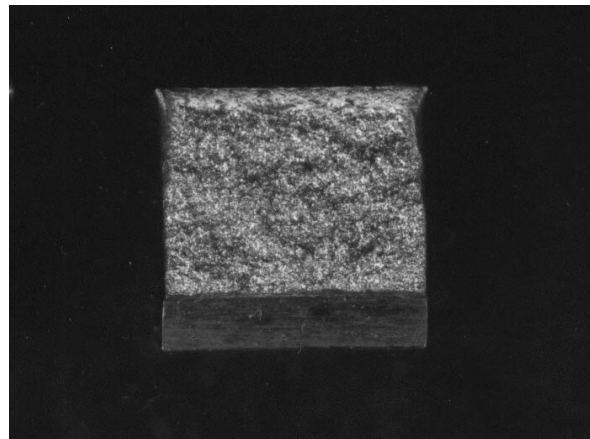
Brittle fracture surface of impact specimen [51].
